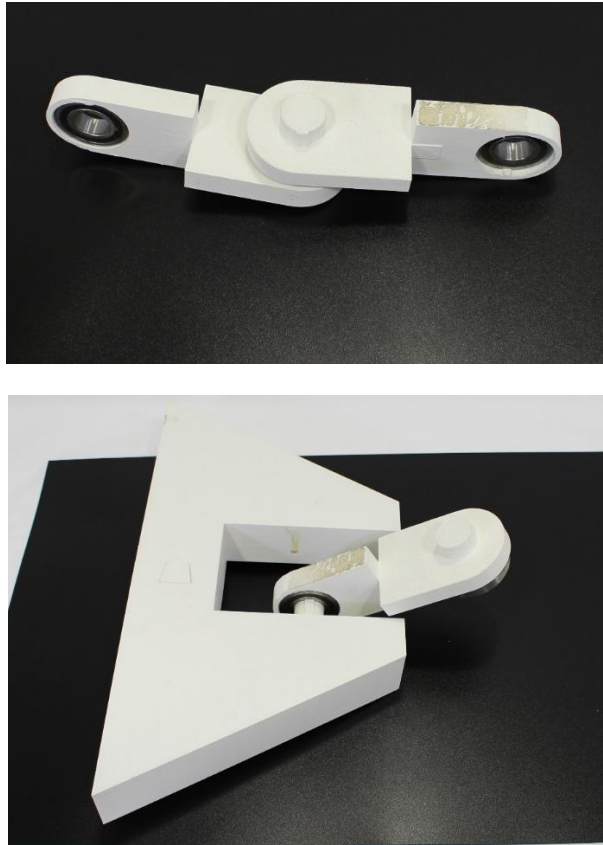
Full Assembly of Dual Axis one way bearing systems- mark 3
